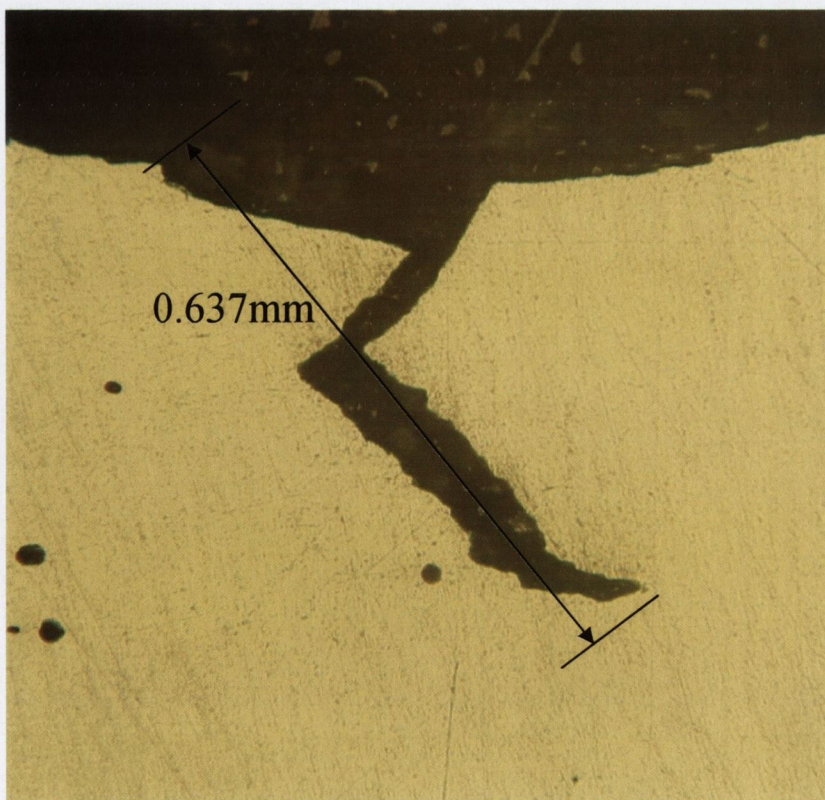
Photograph showing the length of a crack in the second groove which first appeared after 6 rotations of the fastener. (x100)
